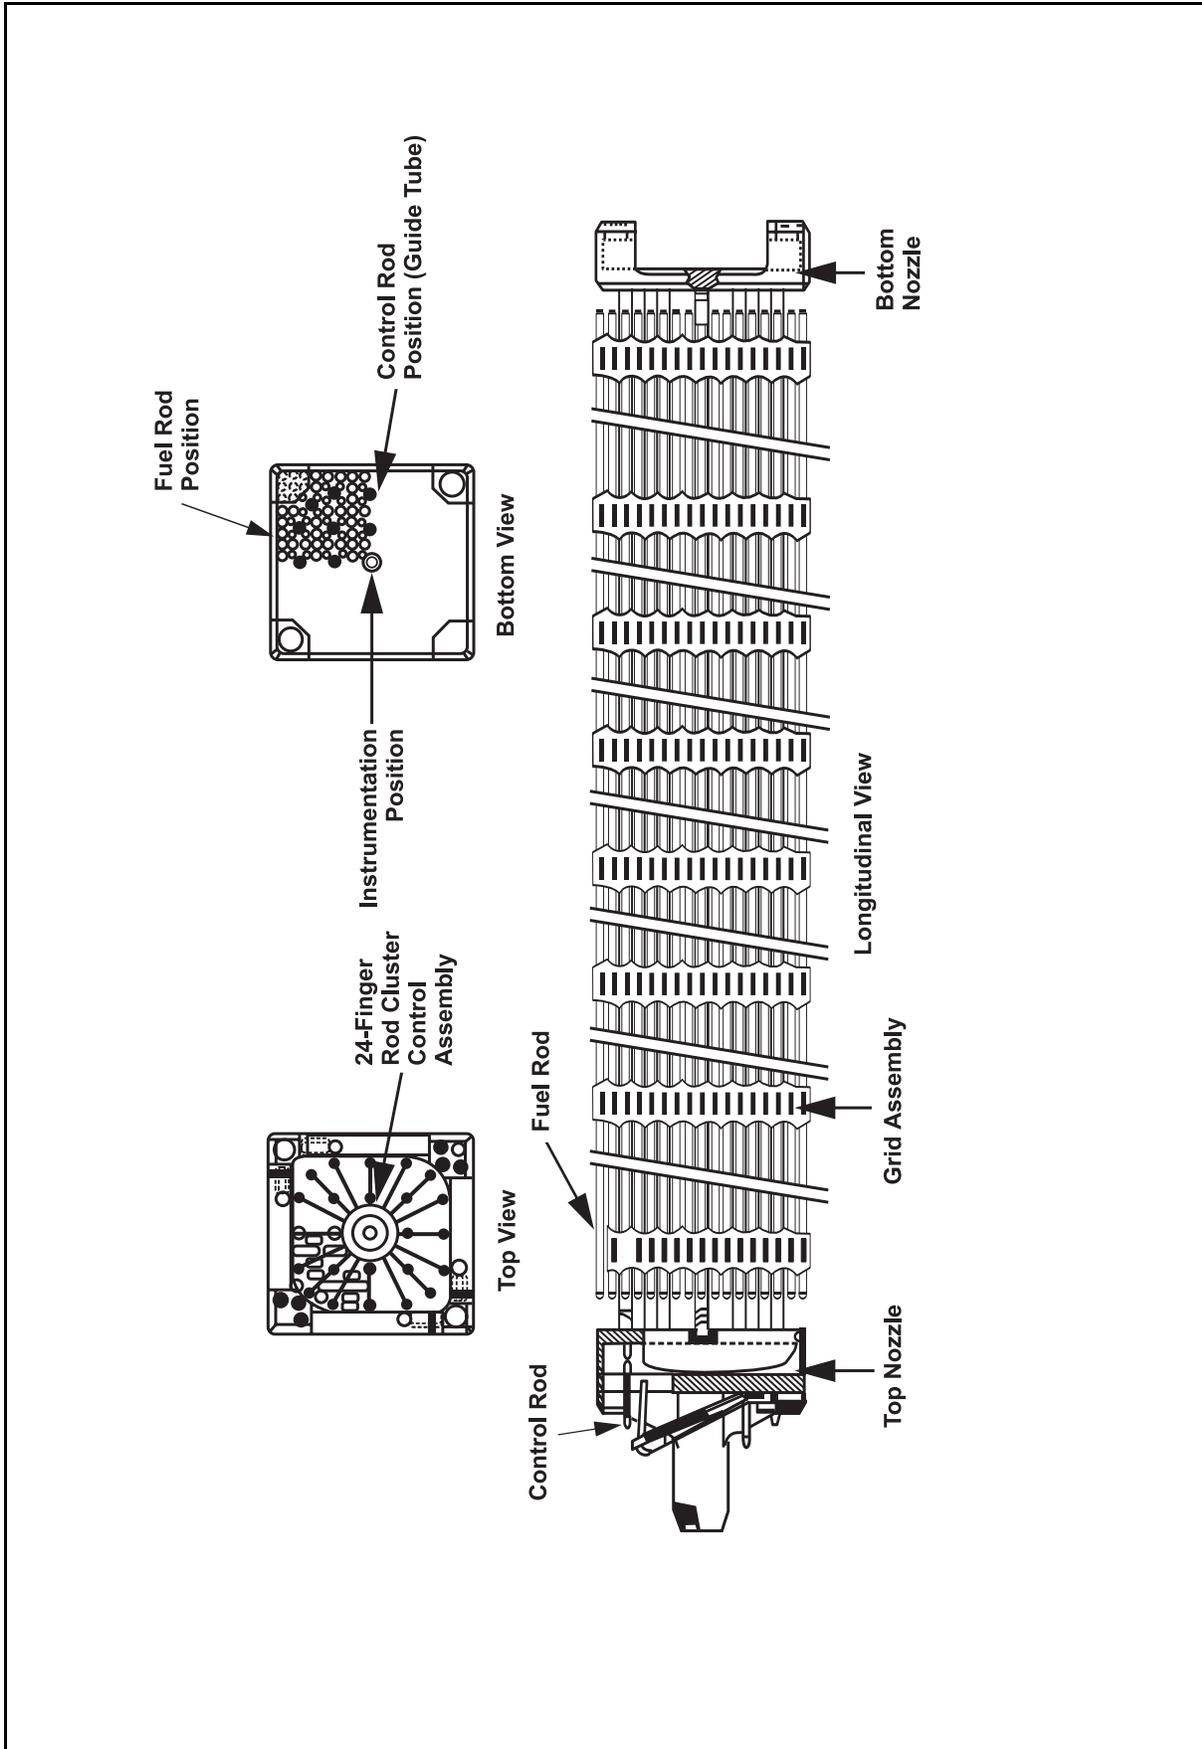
Typical 17 × 17 Reactor Fuel Assembly
